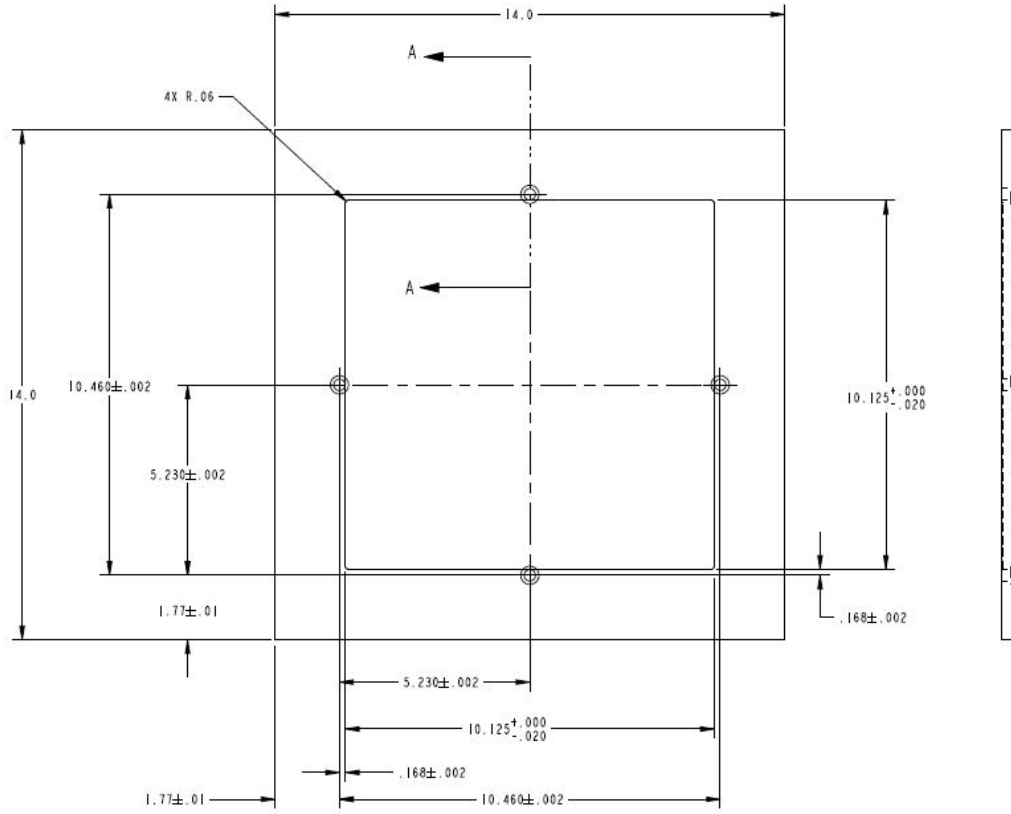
Drawing of a standard polyethylene interstitial plate.
